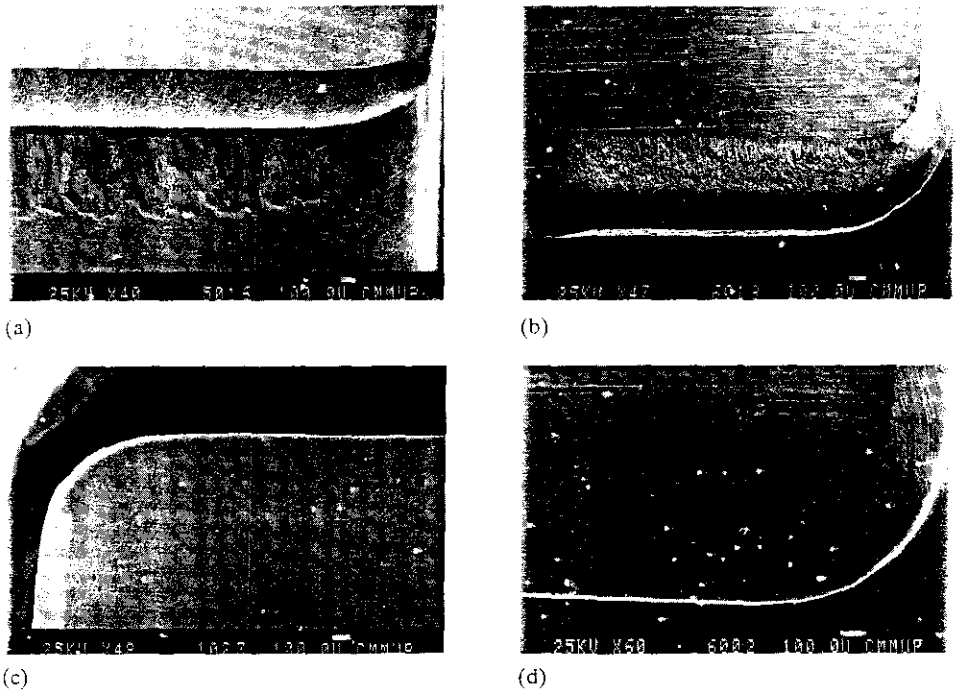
(a) Crater and flank wear of a β - Si_3N_4 insert after high speed machining of tool steel (3.6 m s^{-1} ; $\text{DOC}=4 \text{ mm}$) (SEM/ES). (b) Top view of the CeSiAlON crater land after high speed machining of tool steel (3.9 m s^{-1} ; $\text{DOC}=4 \text{ mm}$) (SEM/ES). (c) Top view of the rake face of a β - Si_3N_4 insert after a long period gray cast iron turning test ($M_r=944 \times 10^{-6} \text{ m}^3$) (SEM/ES). (d) Top view of the CeSiAlON insert tested against gray cast iron ($M_r=1165 \times 10^{-6} \text{ m}^3$) (SEM/ES).
